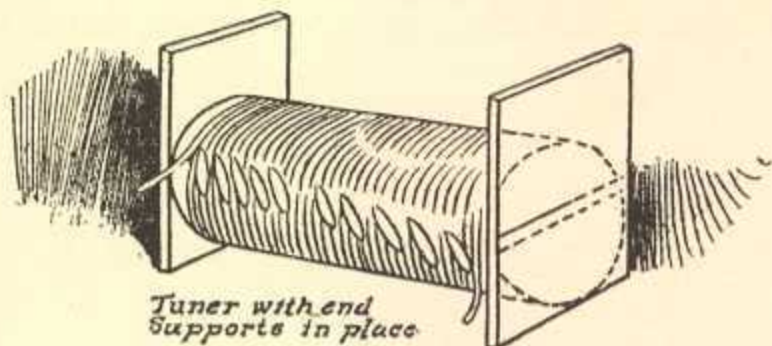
How to Fasten Ends to Oatmeal Box.
